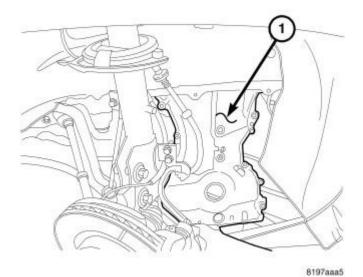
Fuel Line Support Bracket, Generator Mounting Bracket & Bolt Courtesy of CHRYSLER GROUP, LLC
